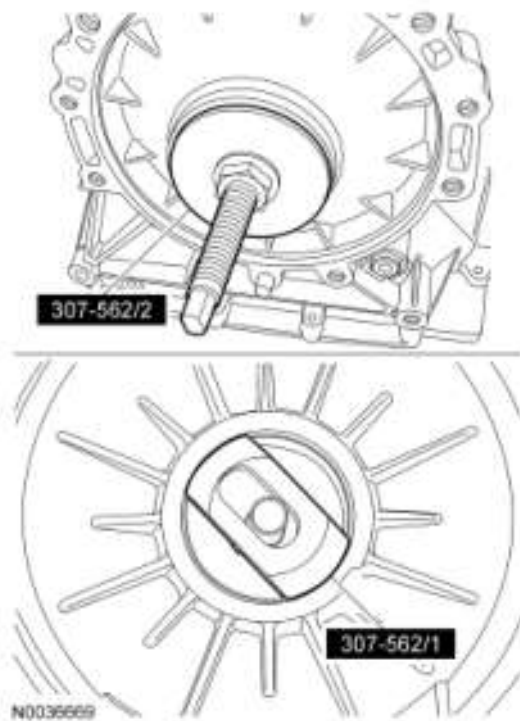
Removing Bearing Assembly Using Special Tool (307-562/1, 307-562/2)
